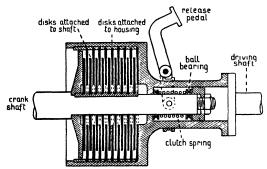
THE CLUTCH OF A MOTOR CAR.
